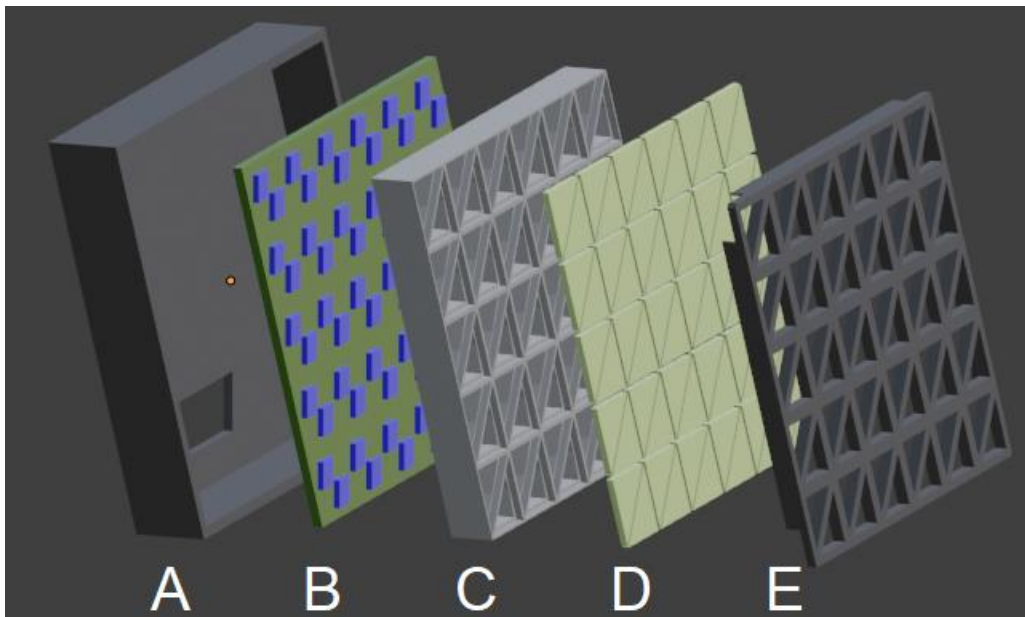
Exploded view of the experimental QLED device assembled. A) Case, B) Blue LEDs, C) Optical system, D) QDF, E) Light cover. Designed for this work.
